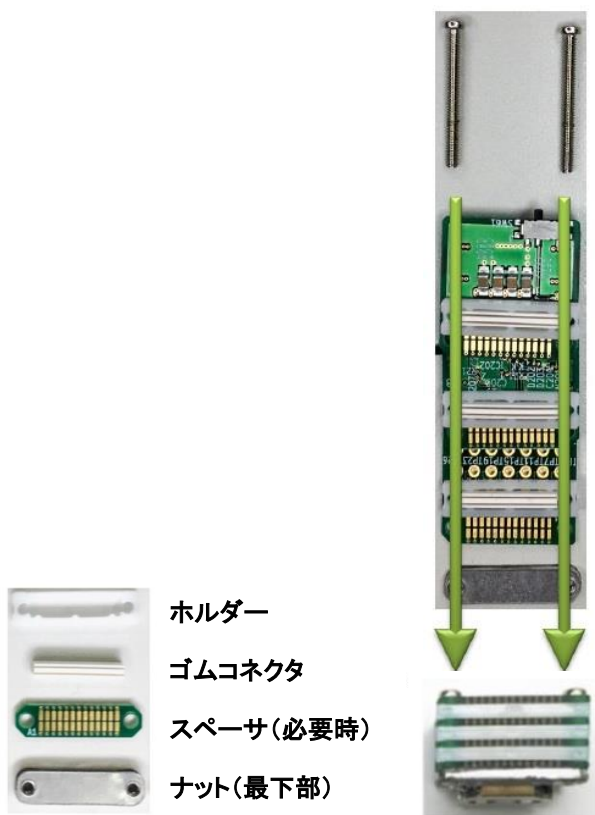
Assembly of Leaf PCBs and rubber connectors
